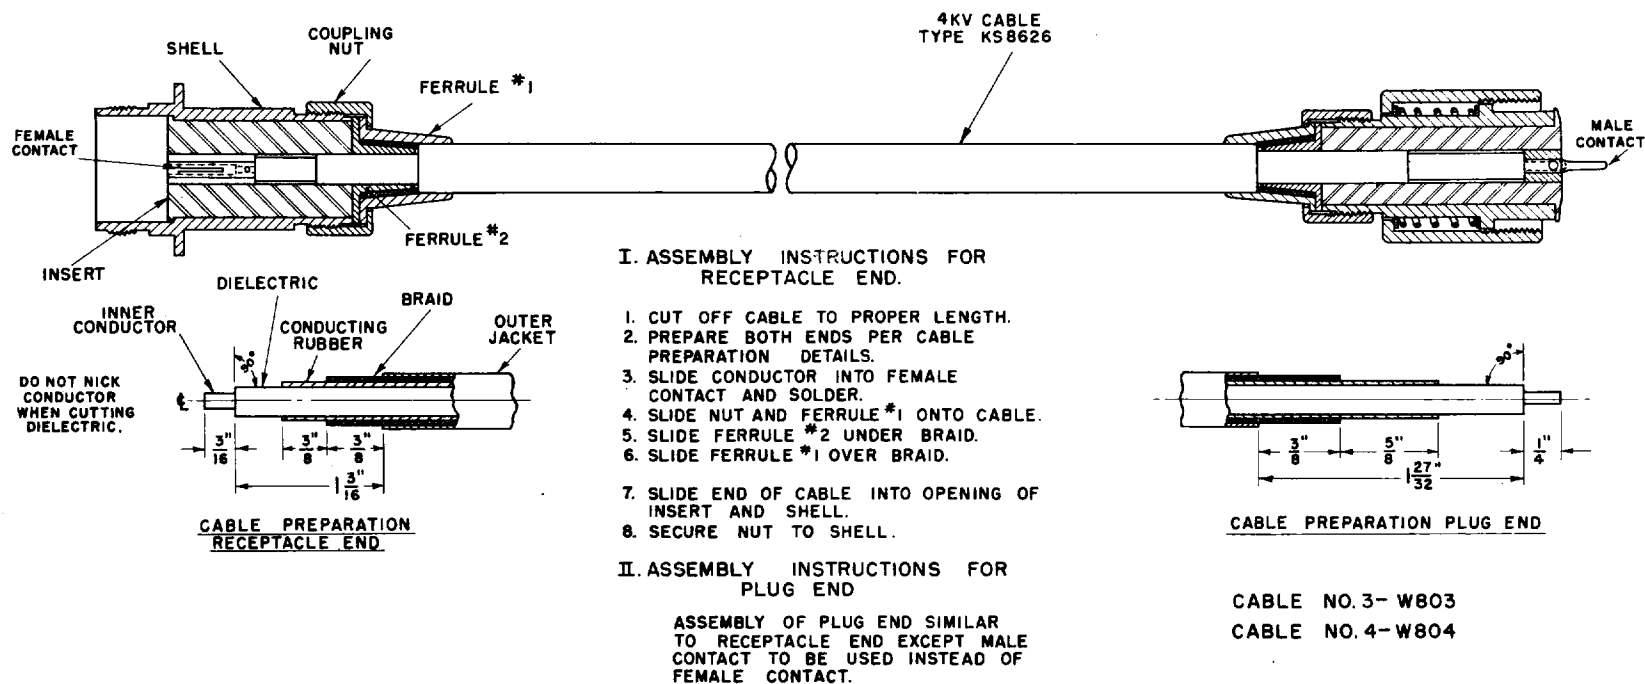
Cable Assembly—Cables No. 3 and 4
